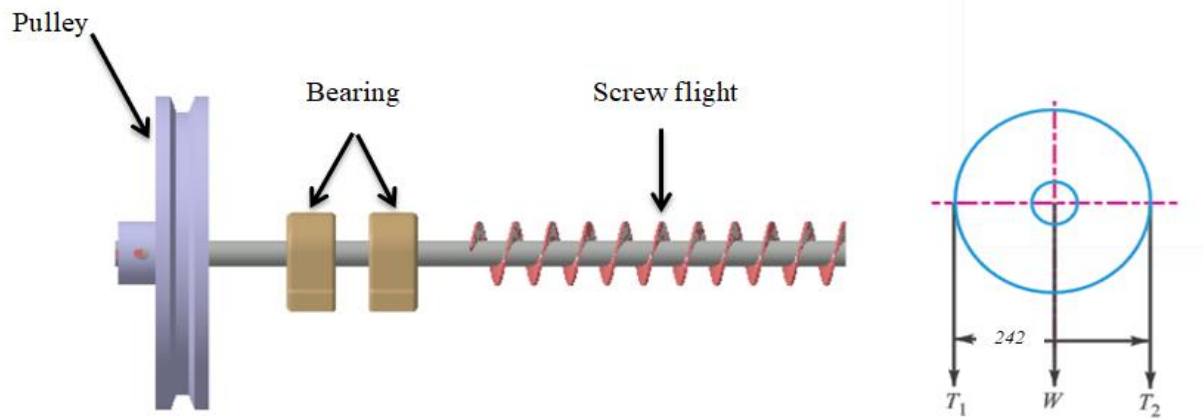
9. Layout of shaft components (all dimensions are in mm)
